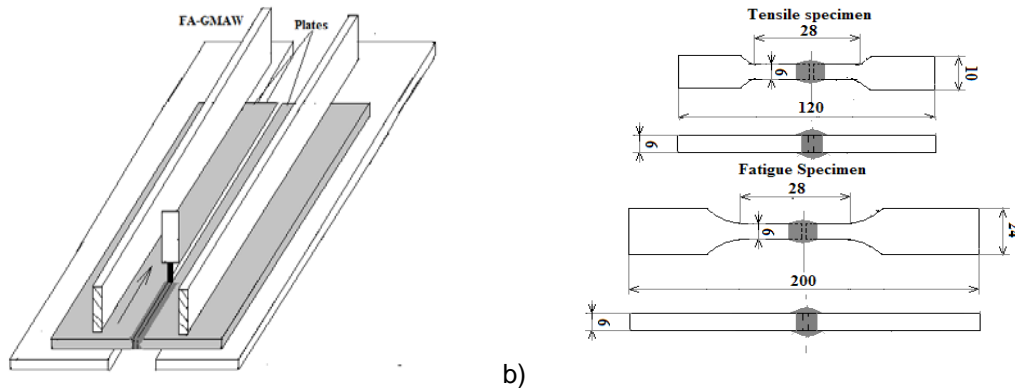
a) FA-GMAW-P welding technique and b) Tensile and fatigue specimens
